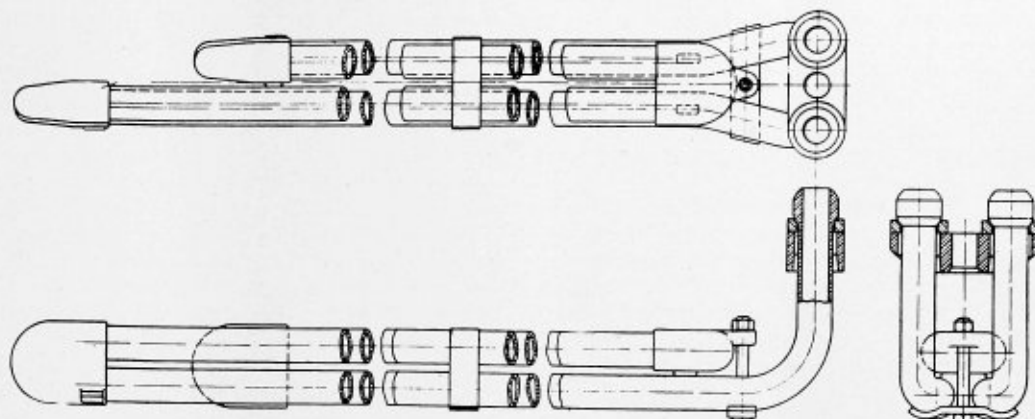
A SUPERHEATER UNIT AND BALL-JOINT CONNECTION
